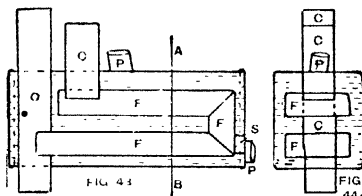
and 44.—Horizontal Section and Cross Section through Complete Boiler
